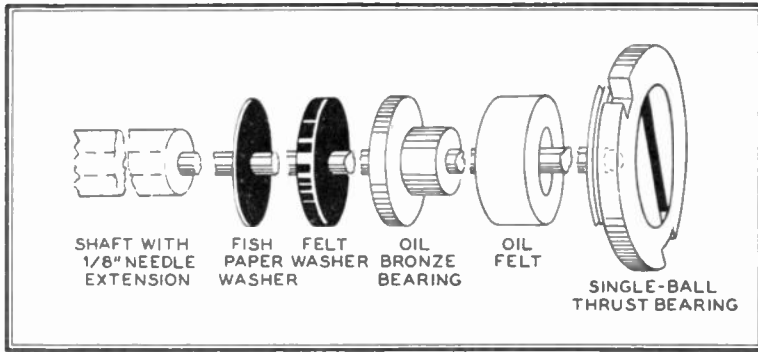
EXPLODED VIEW OF OIL-LESS BEARINGS USED IN CARTER DYNAMOTORS
